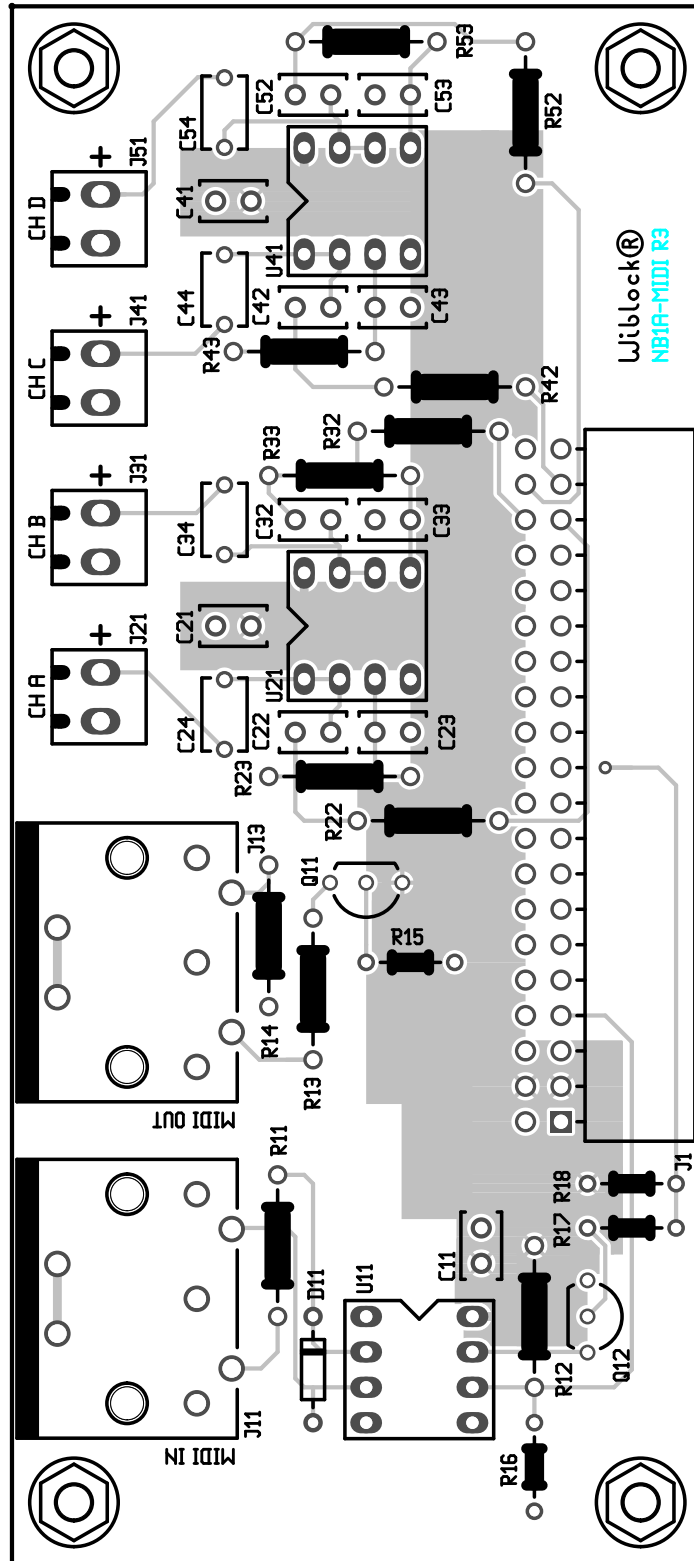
NB1A-MIDI Top Side Assembly Drawing (Rev 3)
